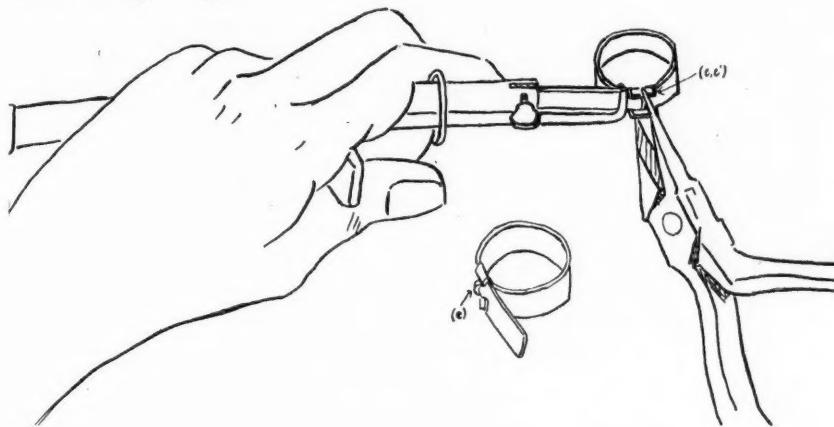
(*c, c'*) Crimping or jointing band; (*e*) loop formed after crimping.
